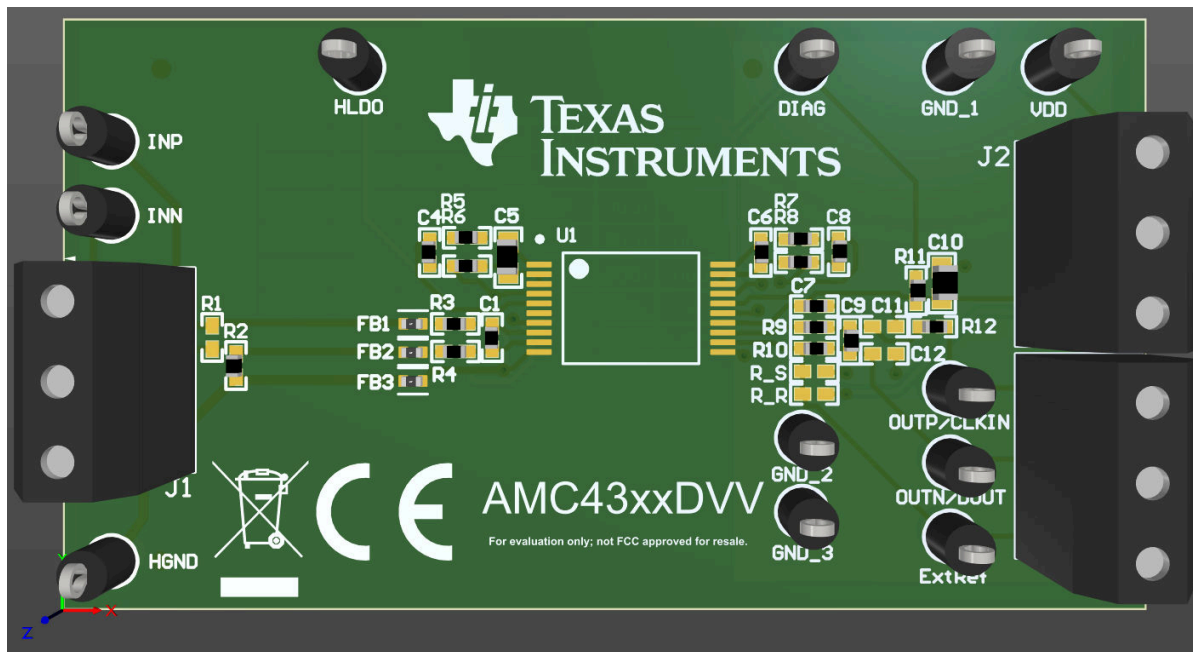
AMC43xxDVVEVM Top 3D PCB Drawing
